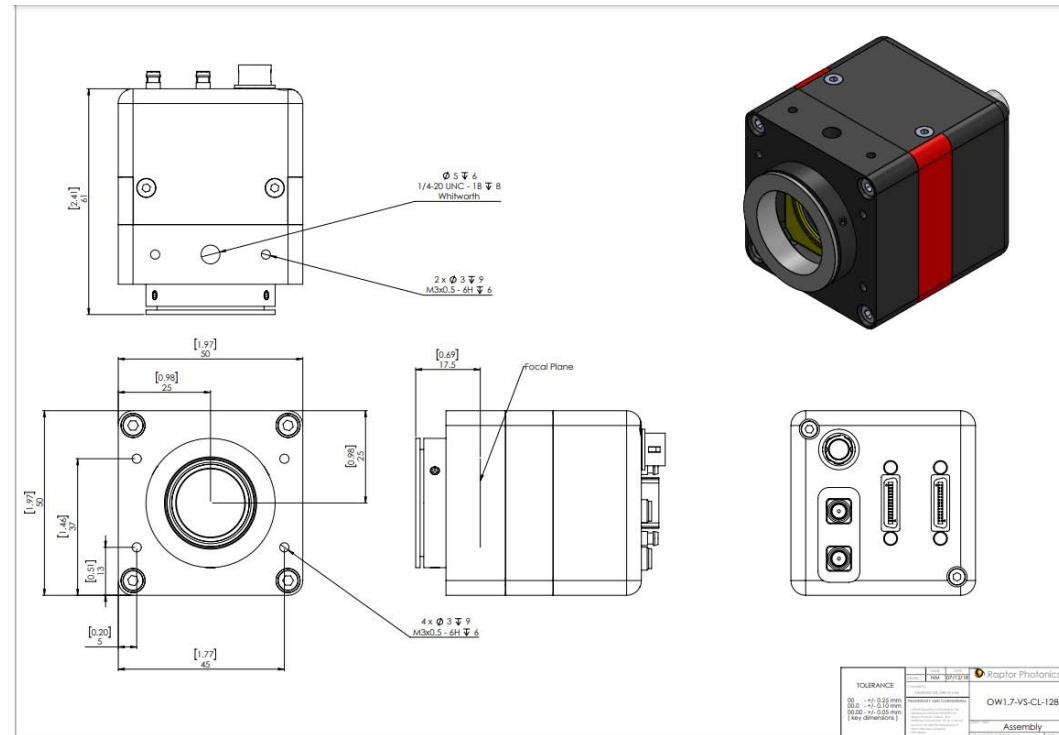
Opto-mechanical interfaces and drawing for the OWL 1280 camera.
